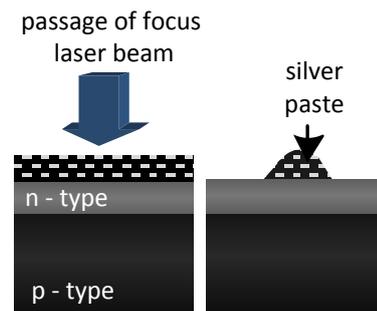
Selective laser sintering of silver paste on the surface of silicon wafer [3]-[5].
